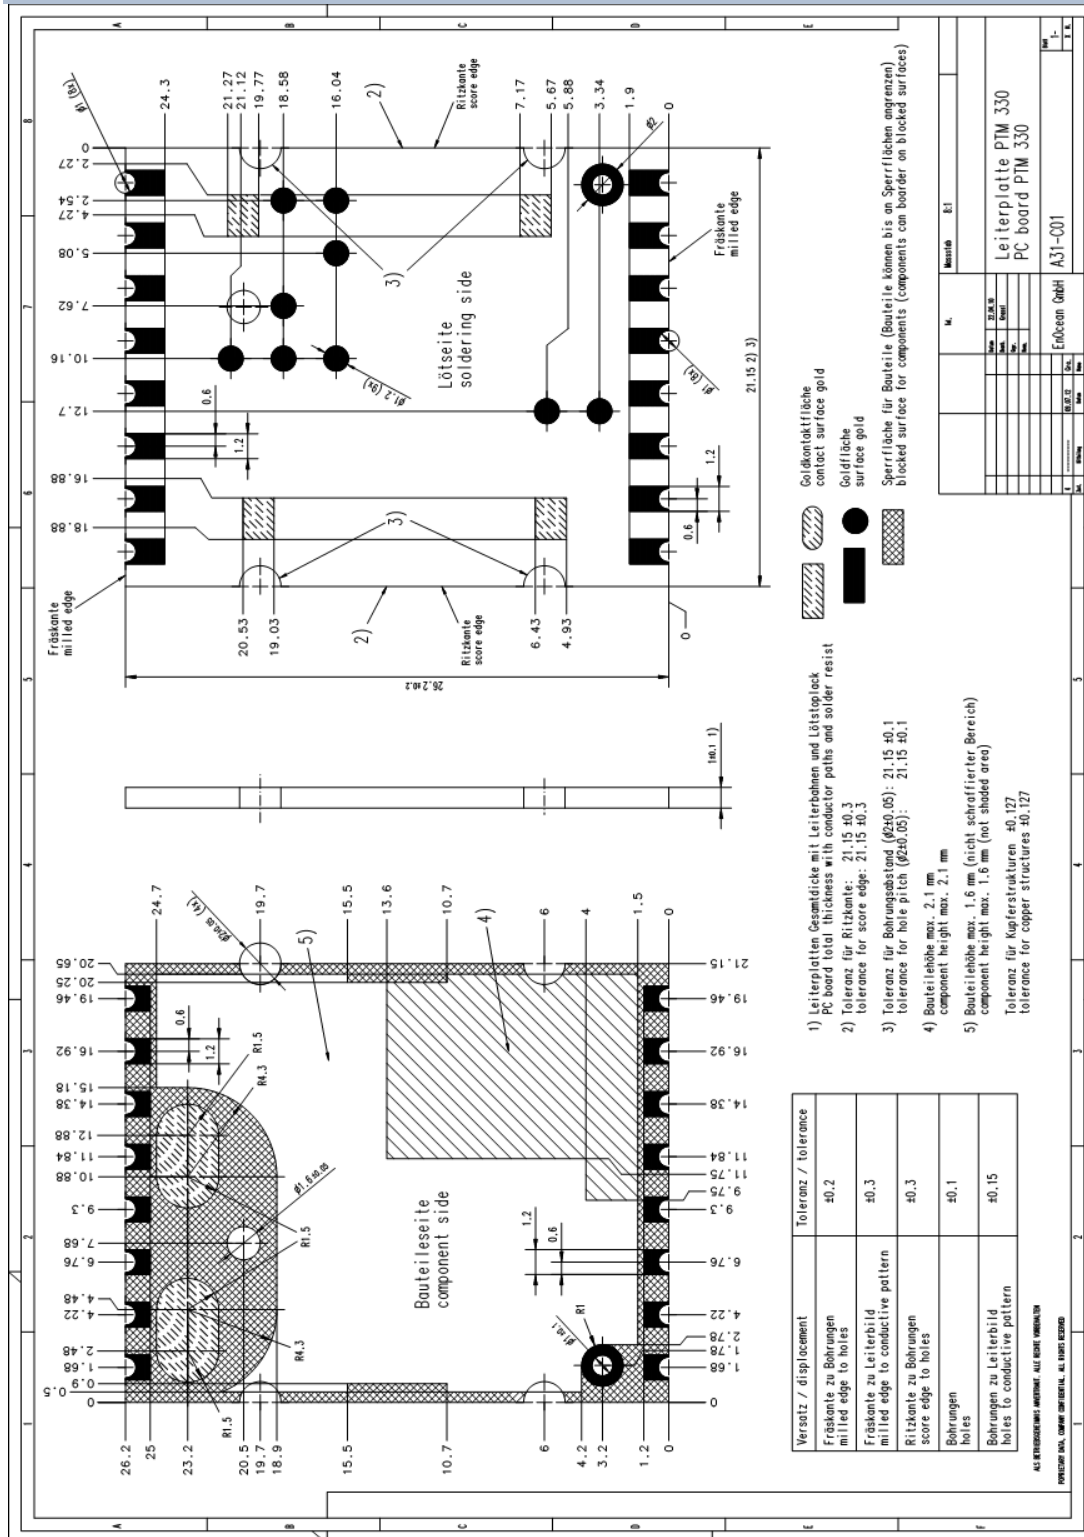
PTM 330 / 332 / 330C / 332C / 330U drawing
